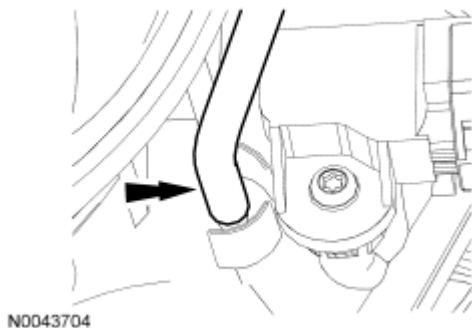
Locating AIR Valve Vacuum Supply Tube
